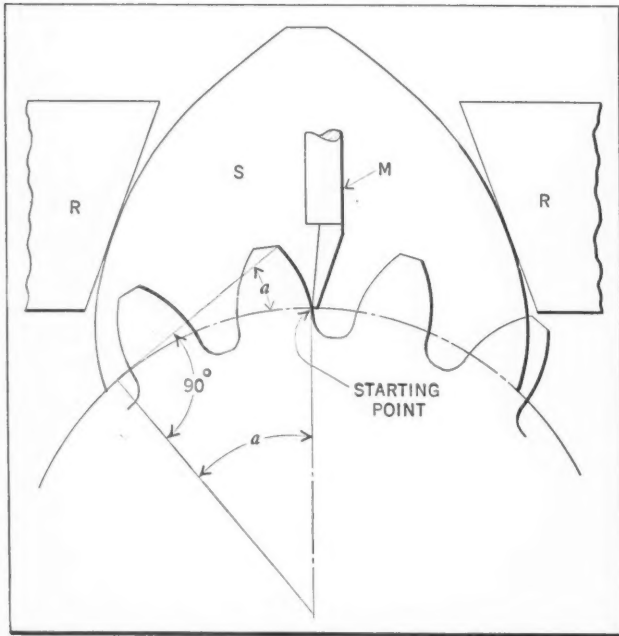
Diagram that Shows the Angle through which the Pointer Travels in Checking an Involute from the Base Circle of a Gear to the Outside Diameter
